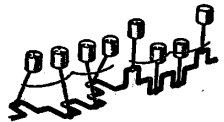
Eight-throw crankshaft with the 4-4 design.
